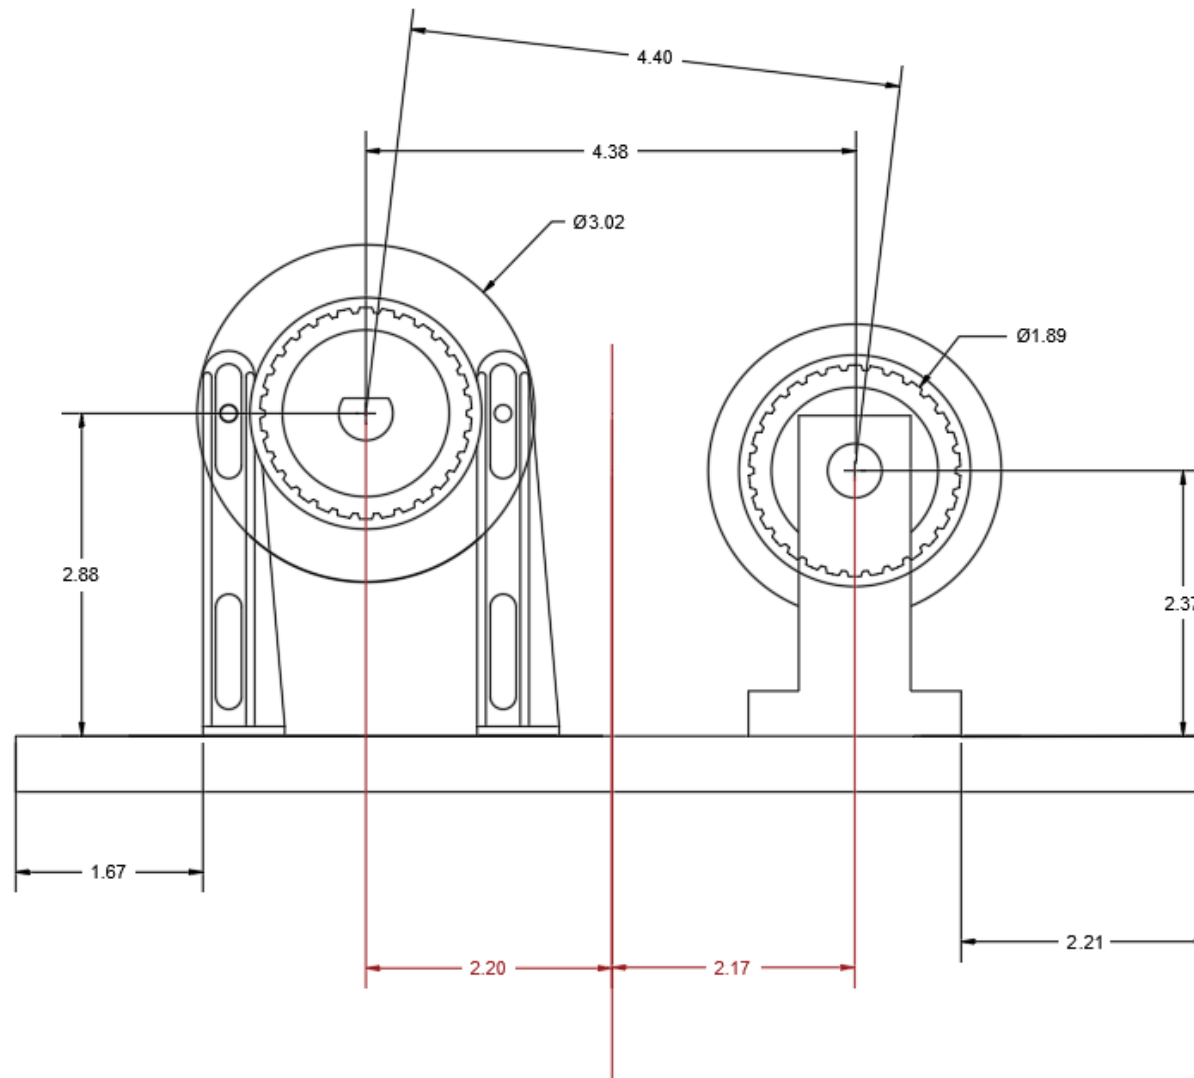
Driver Mechanism for the Lid Driven Cavity Flow, Front View
